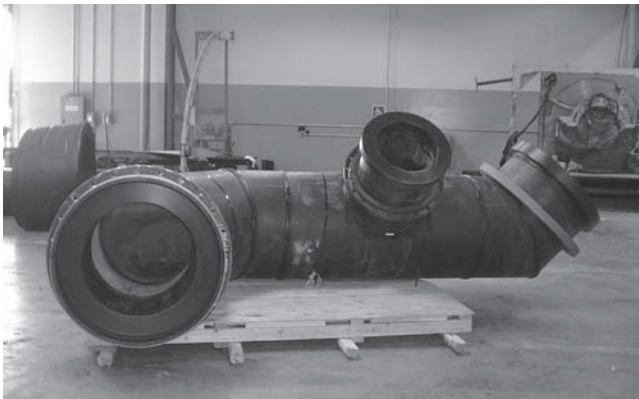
Fused Manifold Assembly with Flange Adapters and Back Up Rings
